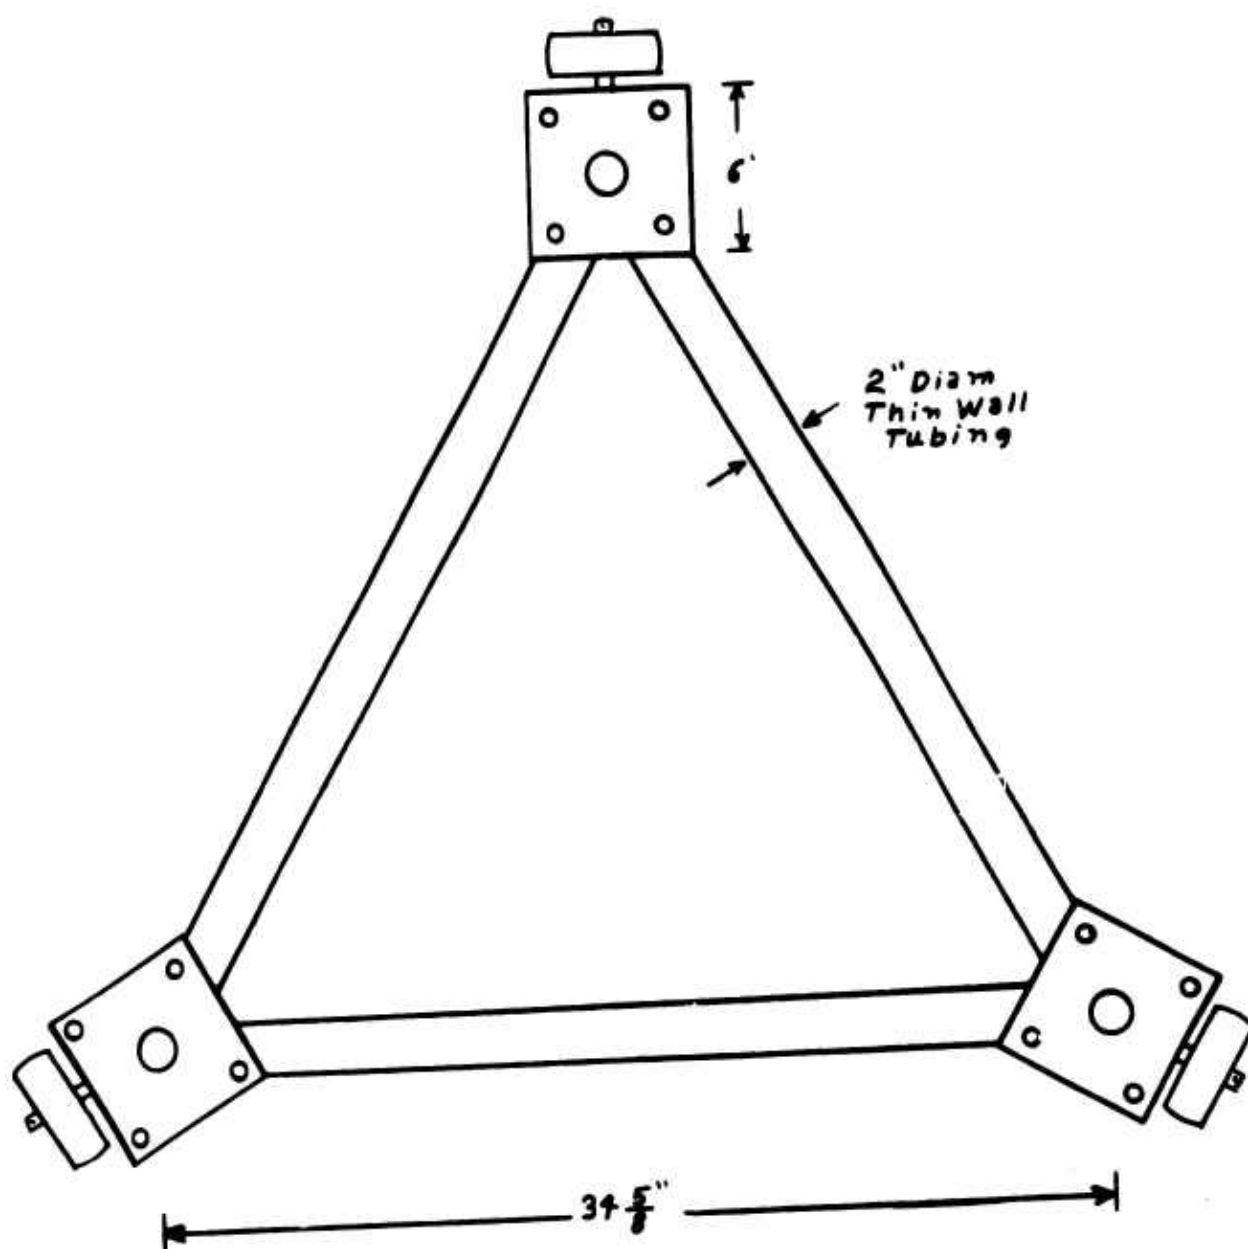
Ultrasonic Hub Positioner Drawing - Assembly
